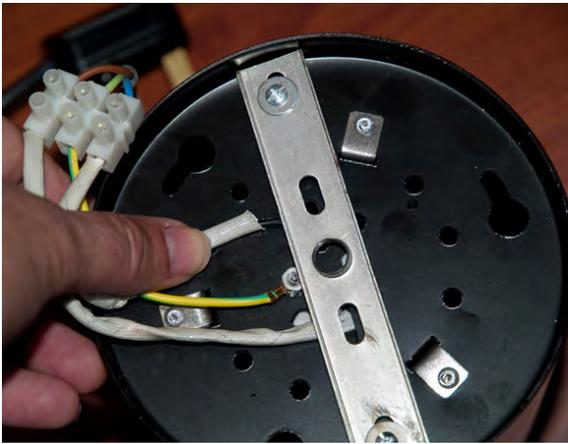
and 3. The heat sheathing is too short and the cable is in direct contact with hot, sharp metal parts.
